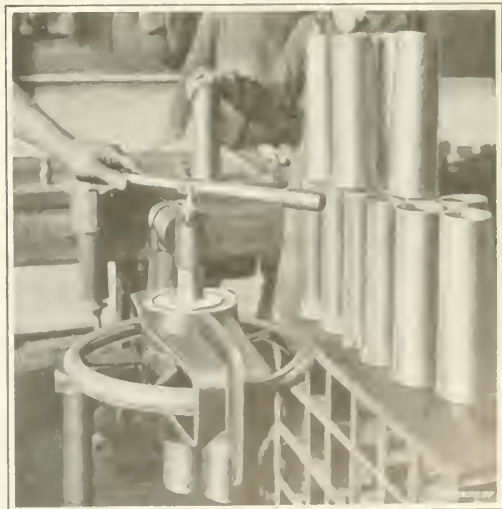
Hand-reaming Primer Pocket in Head of Cartridge Case
